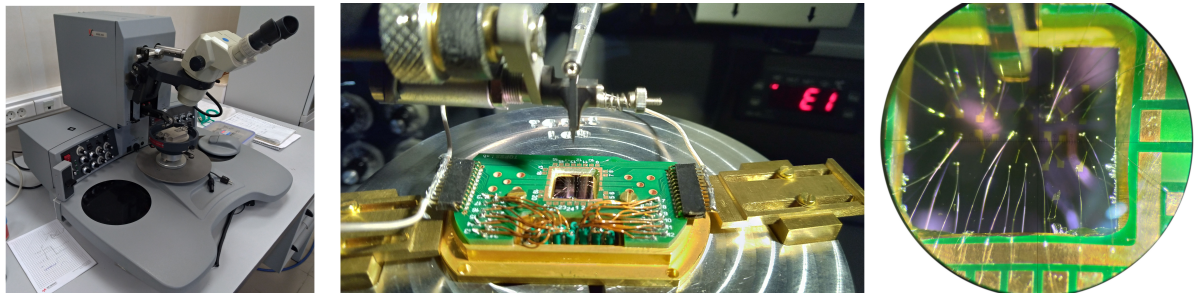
Bonding-related equipment. Left. Ultra-sonic micro-welding machine K&S 4526. Center Sample holder for low-temperature part placed on table for bonding. Right Samples on the silicon substrate, connected to holder via aluminum micro-wires.
